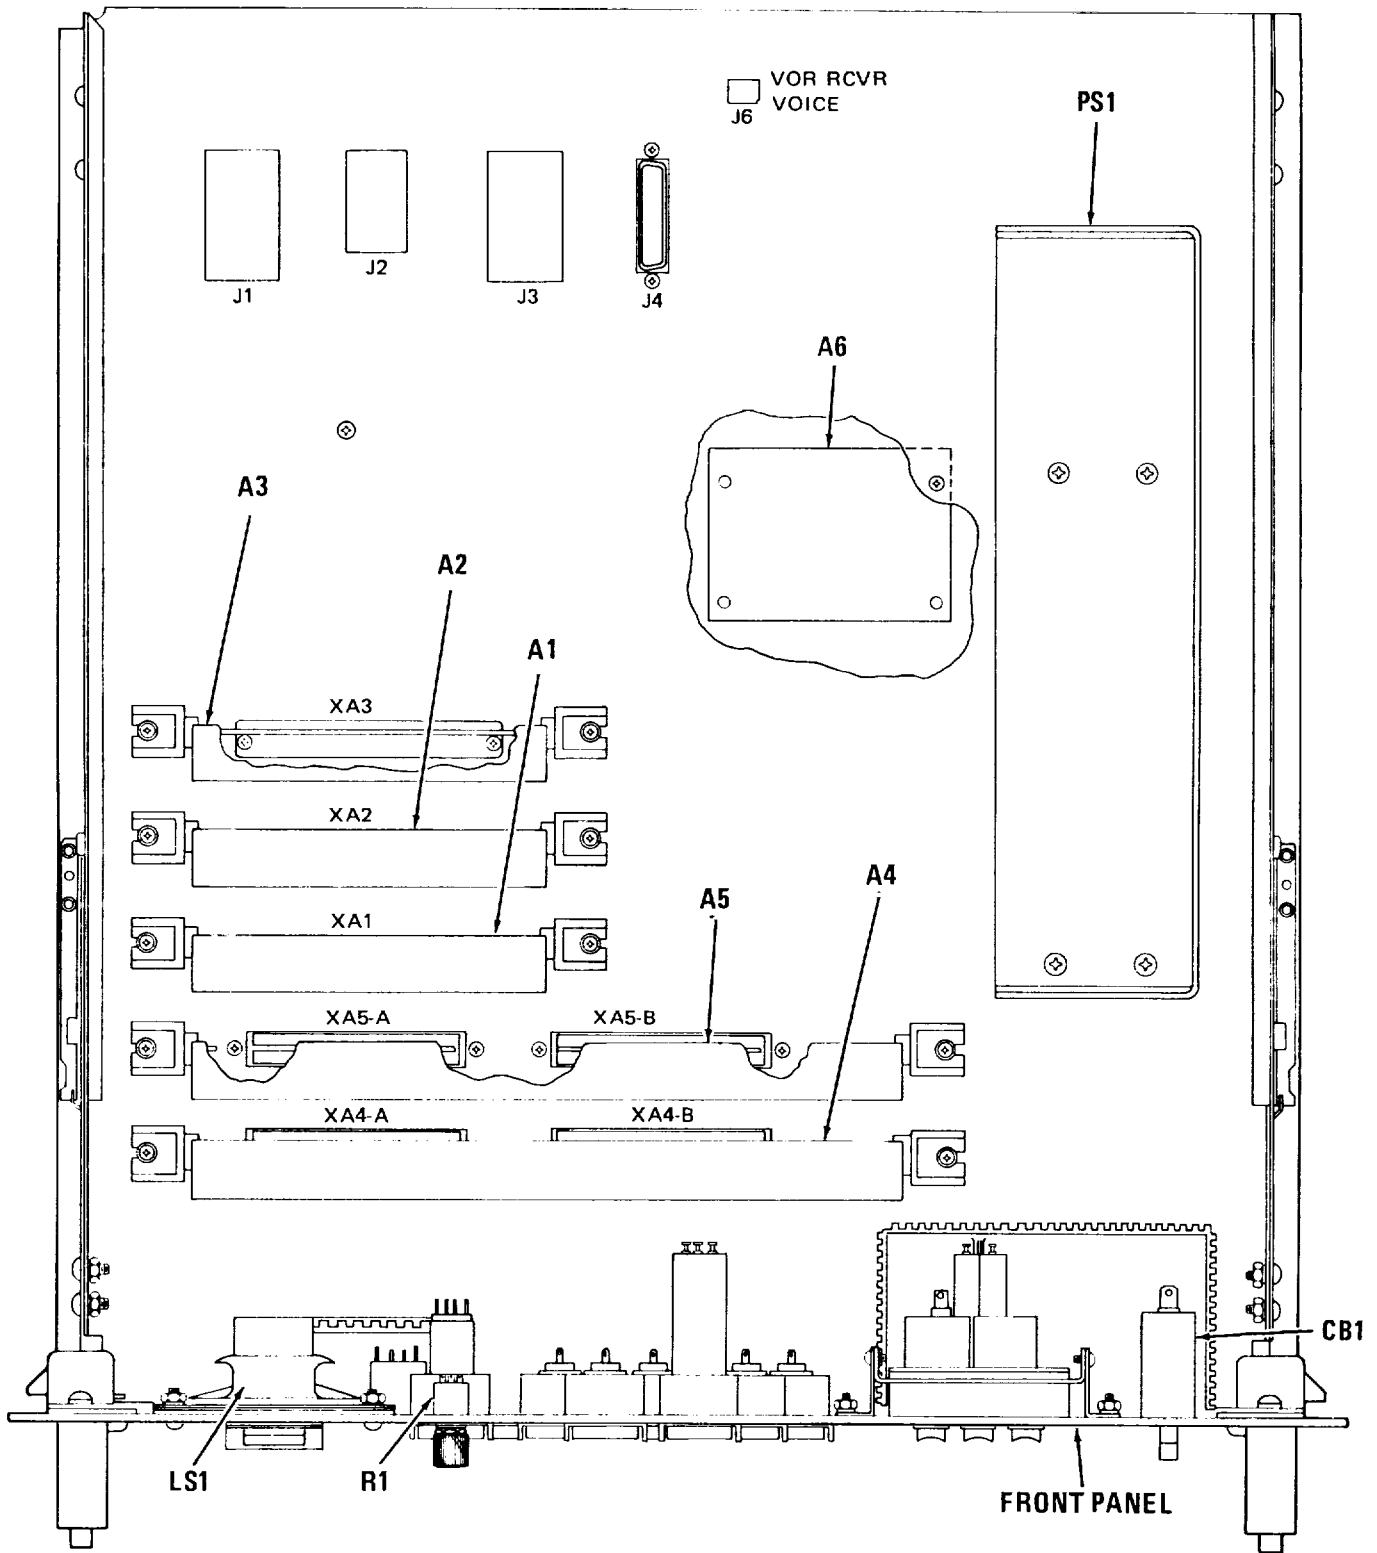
VOR Local Control Front Panel and Chassis Mounted Parts Location Diagram (Sheet 1 of 4)
